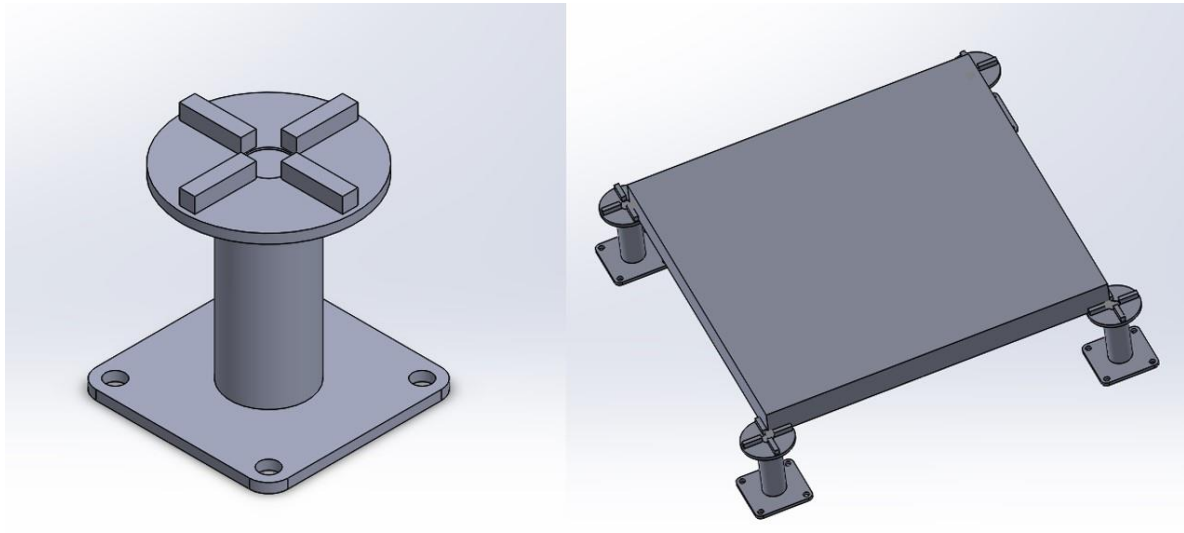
Initial design for the pedestal unit (left) and the raised access floor system (right)
